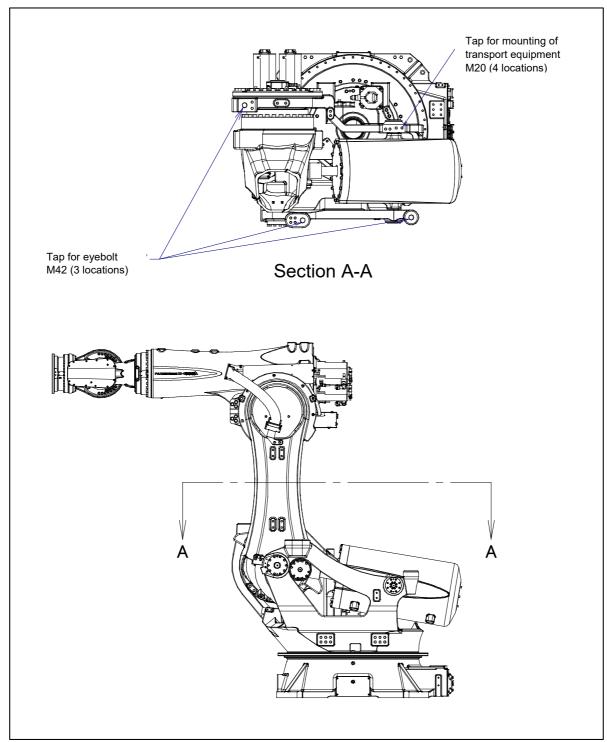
(a) Position of the transport equipment and eyebolt mounting
